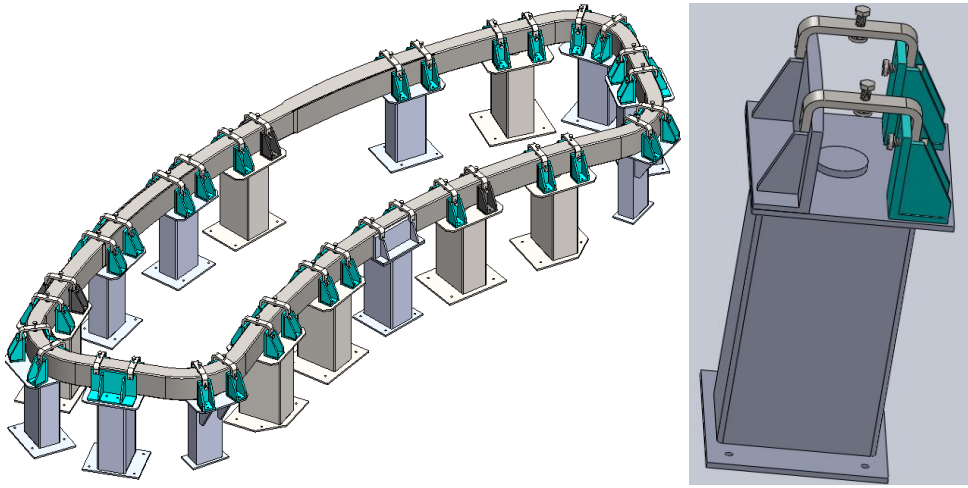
Overview of welding fixture for BTCC case
